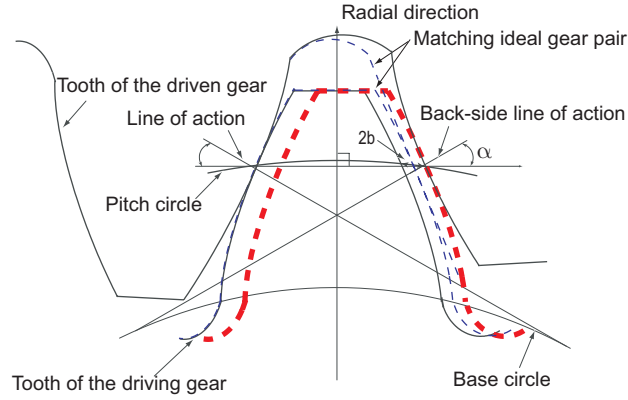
The drive-side and back-side gear mesh contacts for a gear pair with $2b$ backlash and its matching ideal gear pair.
